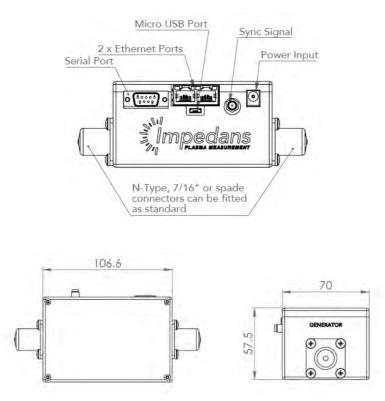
Dimensional drawings of the standard Octiv Poly model 02-232-01 with Quick Change RF connector interface. All dimensions are in mm. Contact Impedans for dimensional drawings of other models.
